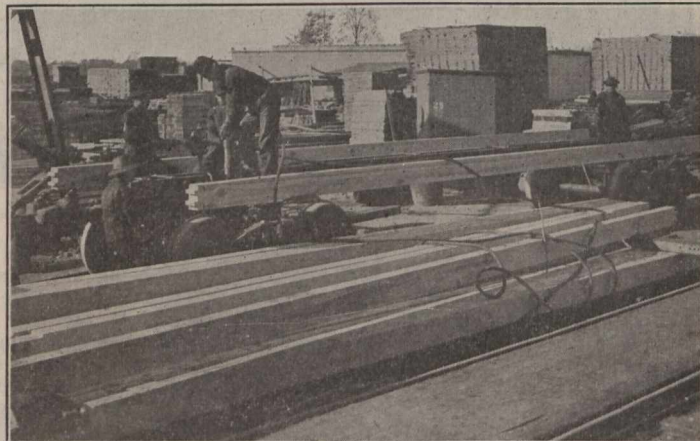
Rivetting Centre Sill to Body Bolster.
